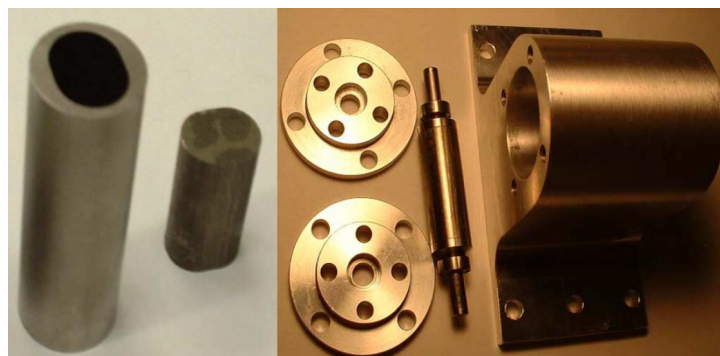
The hollow shaft and magnet (left), housing, two caps, and the integrated rotor (right) of the 2kw, 200,000 rpm PM machine in [23].
